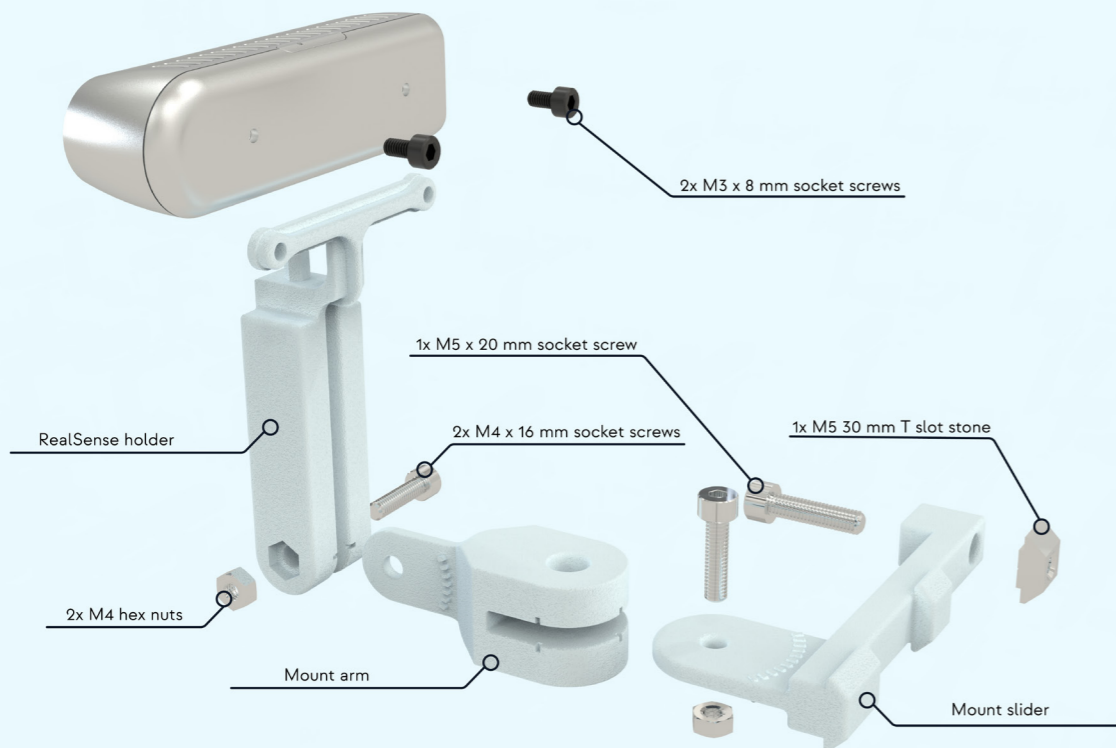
An exploded view of the camera mount with all its components labeled.
